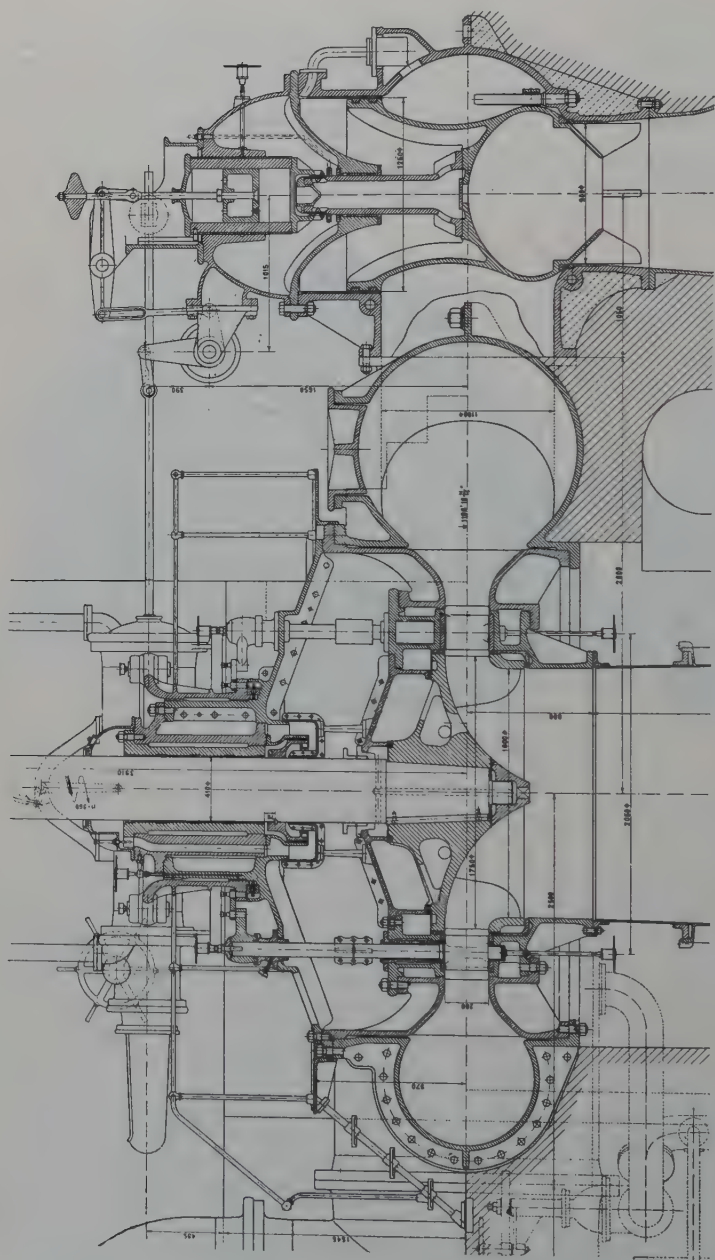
SECTION THROUGH TURBINE AND PRESSURE REGULATOR
